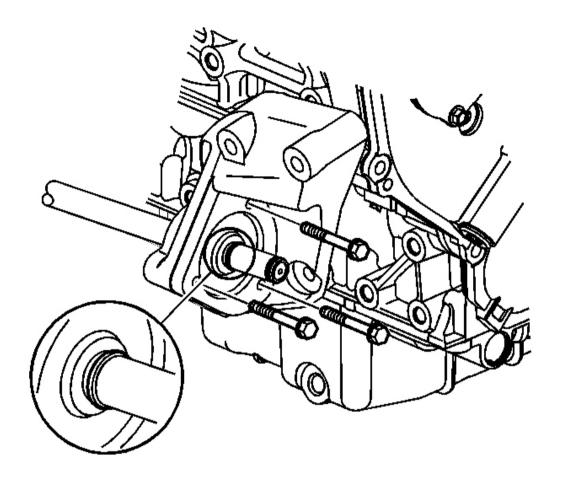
Front Transaxle Mount & Bolts Courtesy of GENERAL MOTORS CORP.
